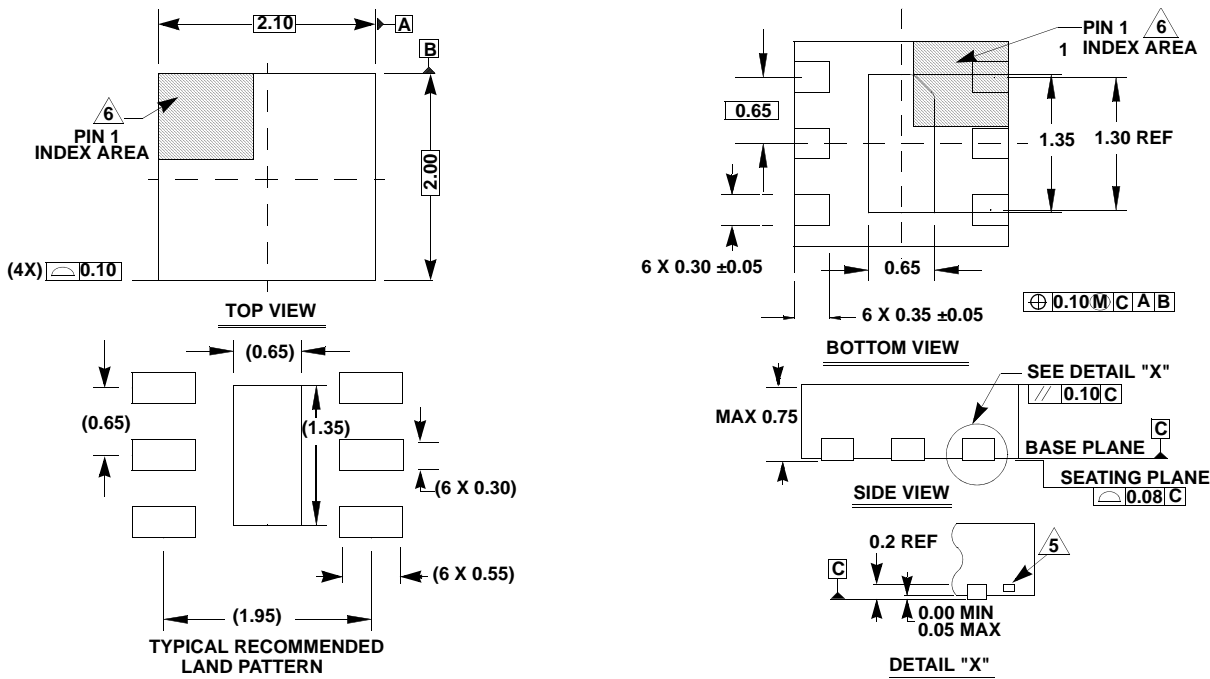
ODFN 6 LD PACKAGE DIMENSIONS
